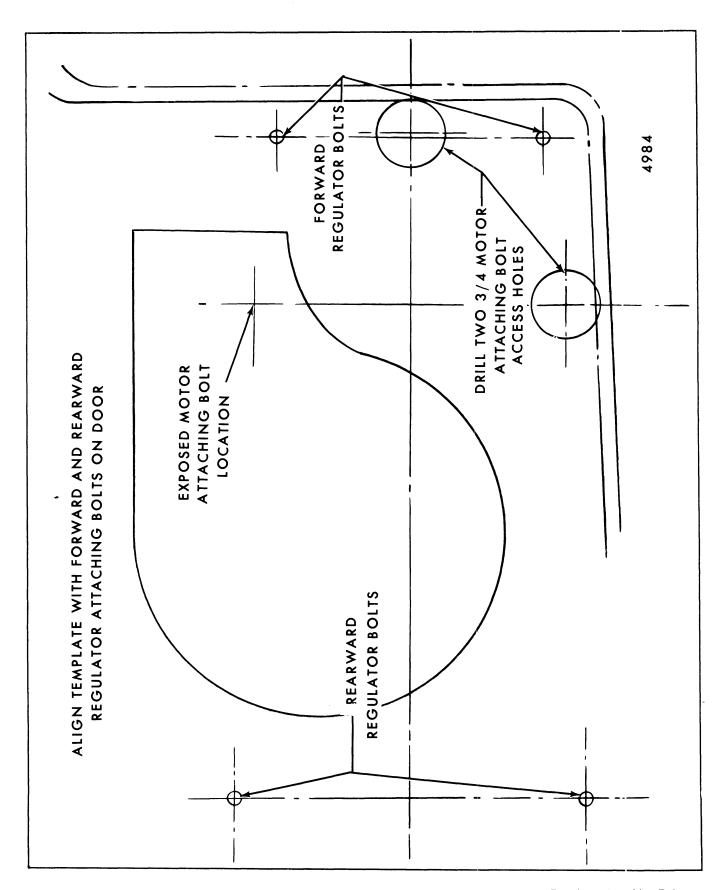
Window Regulator Lower Attaching Bolt Reference Points for Locating Window Motor to Regulator Attaching Bolts - "A-29,35" Styles-Rear Door
